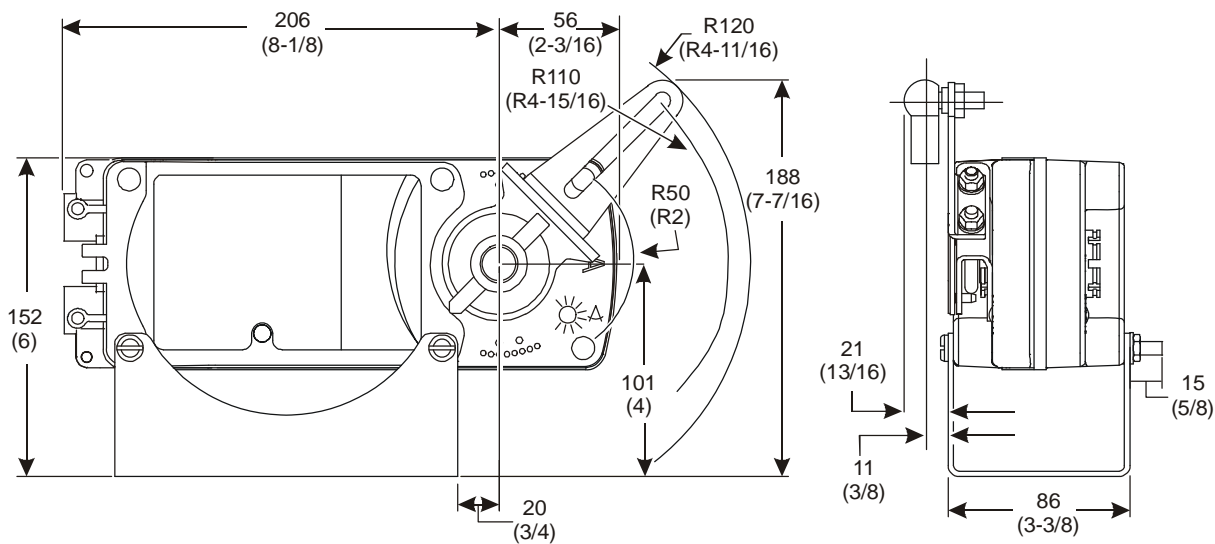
M9000-170 Remote Mounting Kit (with Actuator) Overall Dimensions, mm (in.)
